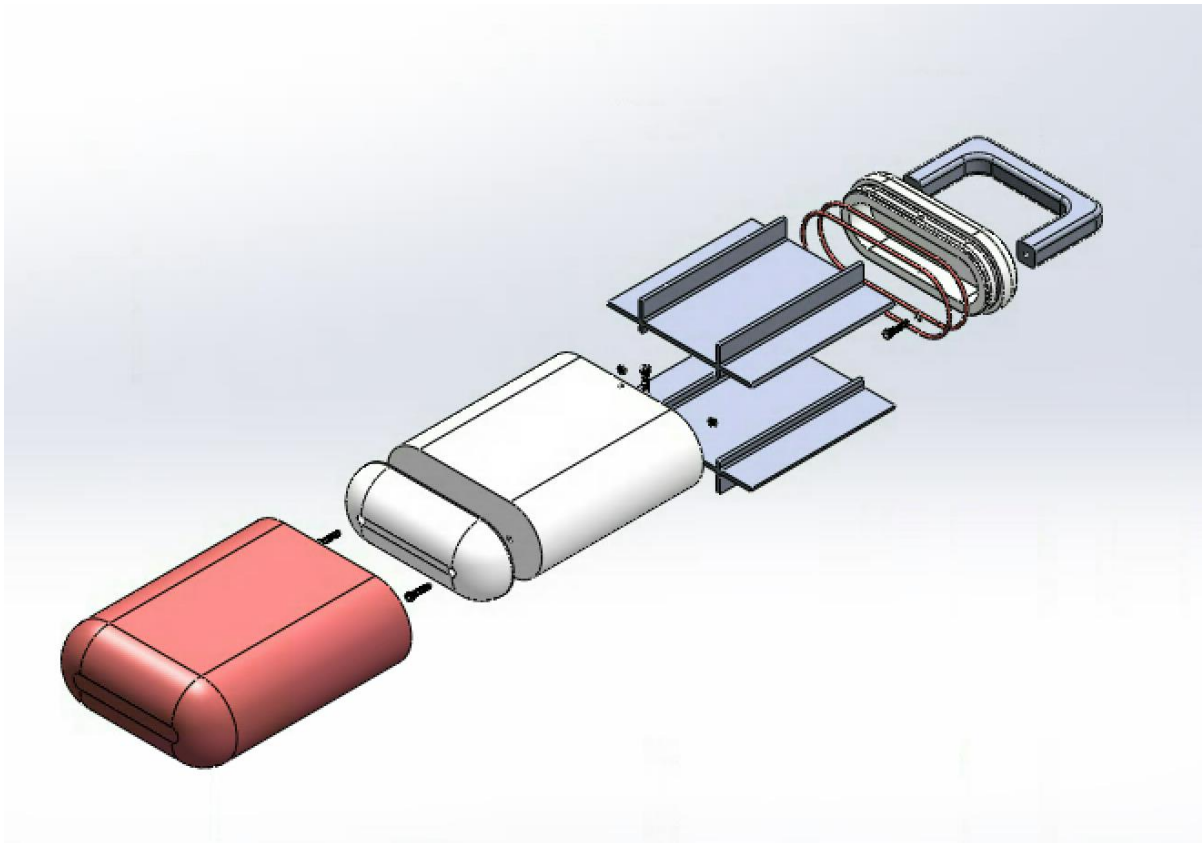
Isometric View of Exploded RED Mechanical Assembly
